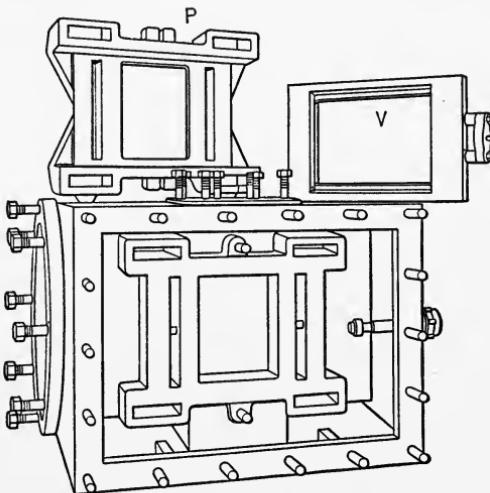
Valve, Valve Chest and Pressure Plate of Ridgway Engine.
